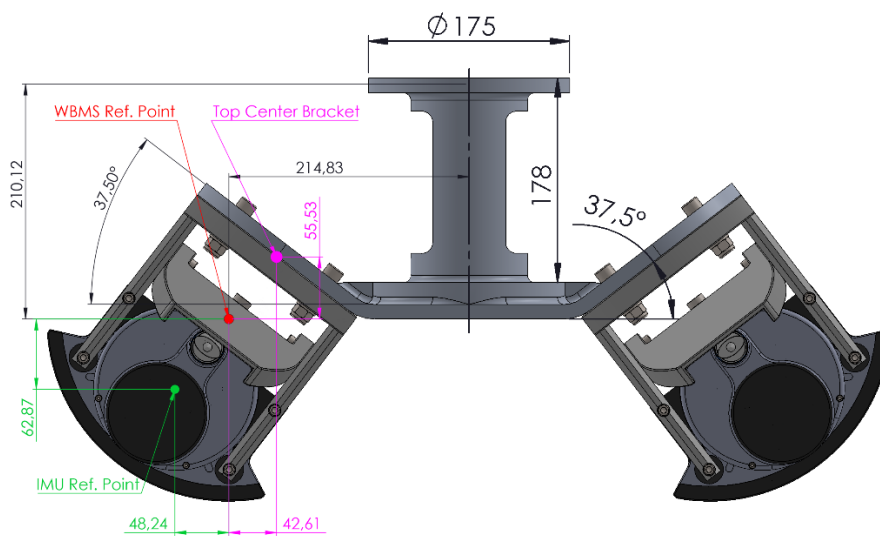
Rear view of iWBMS/iWBMSH (1° TX) in the standard dual head bracket with dimensions to center of flange.
